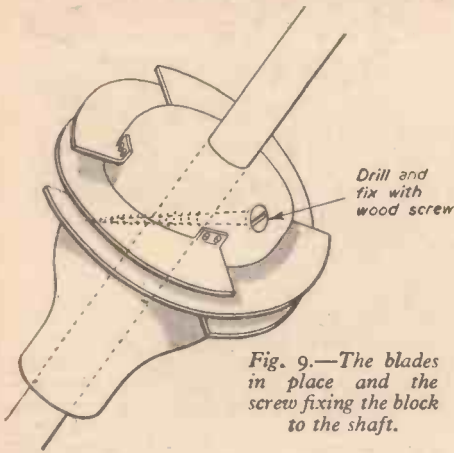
The blades in place and the screw fixing the block to the shaft.
